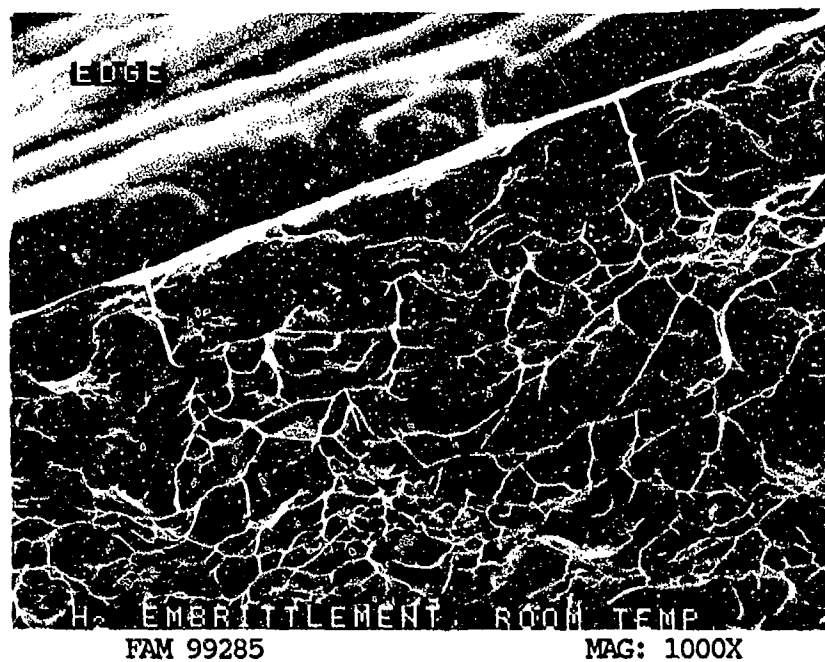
Tensile dimples near the edge of the specimen. The outermost fracture surface is relatively smooth and featureless (brackets).
